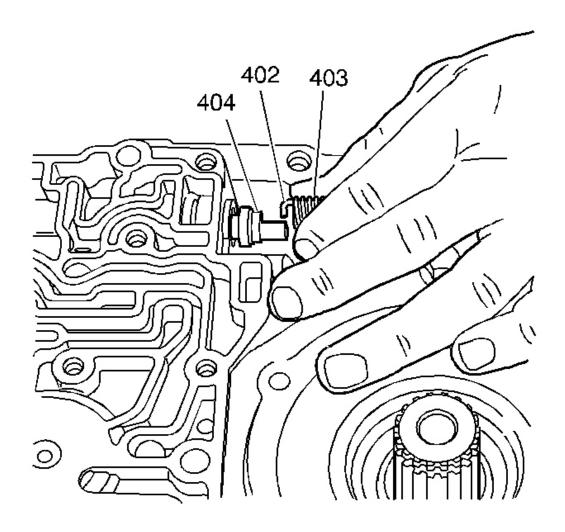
Connecting Manual Valve Link To Manual Valve Courtesy of GENERAL MOTORS CORP.
